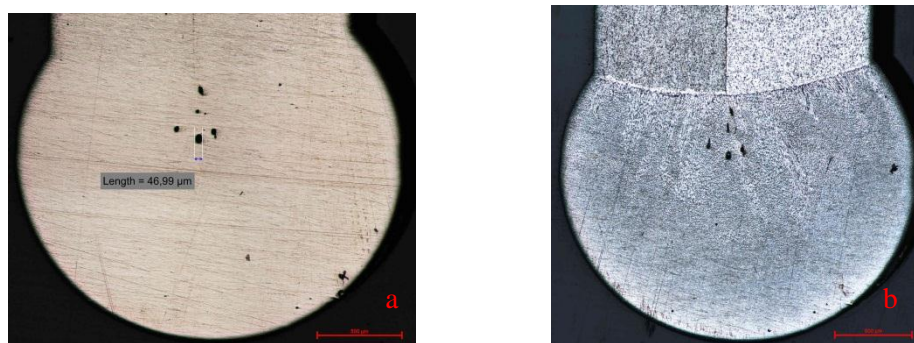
Microscopic cross section of the welds: a) the weld non-etched, b) the weld etched by Keller's reagent.
